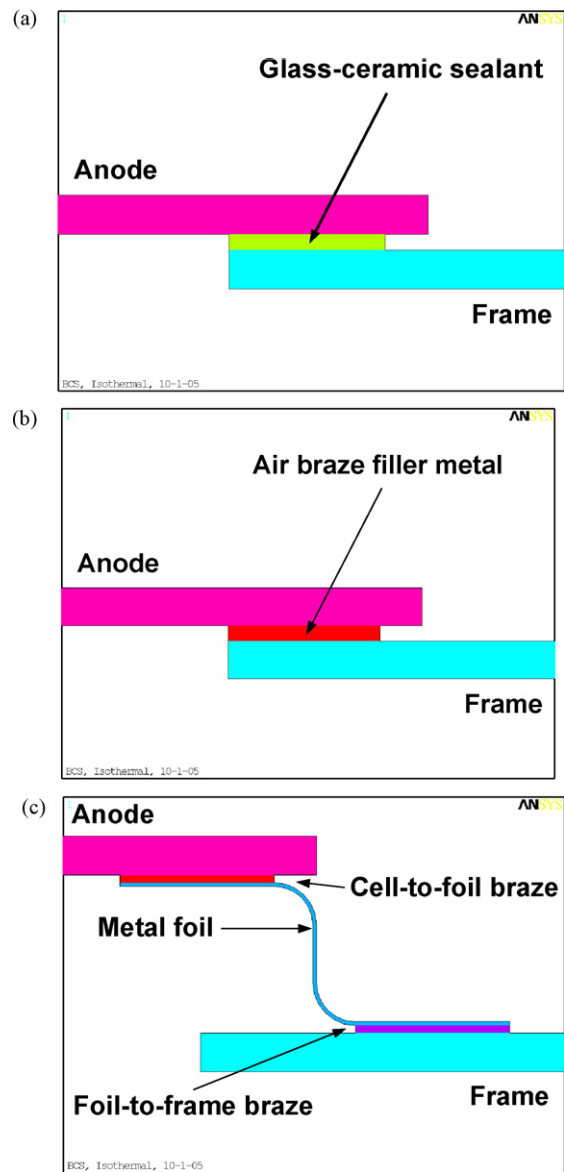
Cross-sectional schematics of: (a) the glass-ceramic seal design, (b) the air brazed seal design, and (c) the BCS design.
